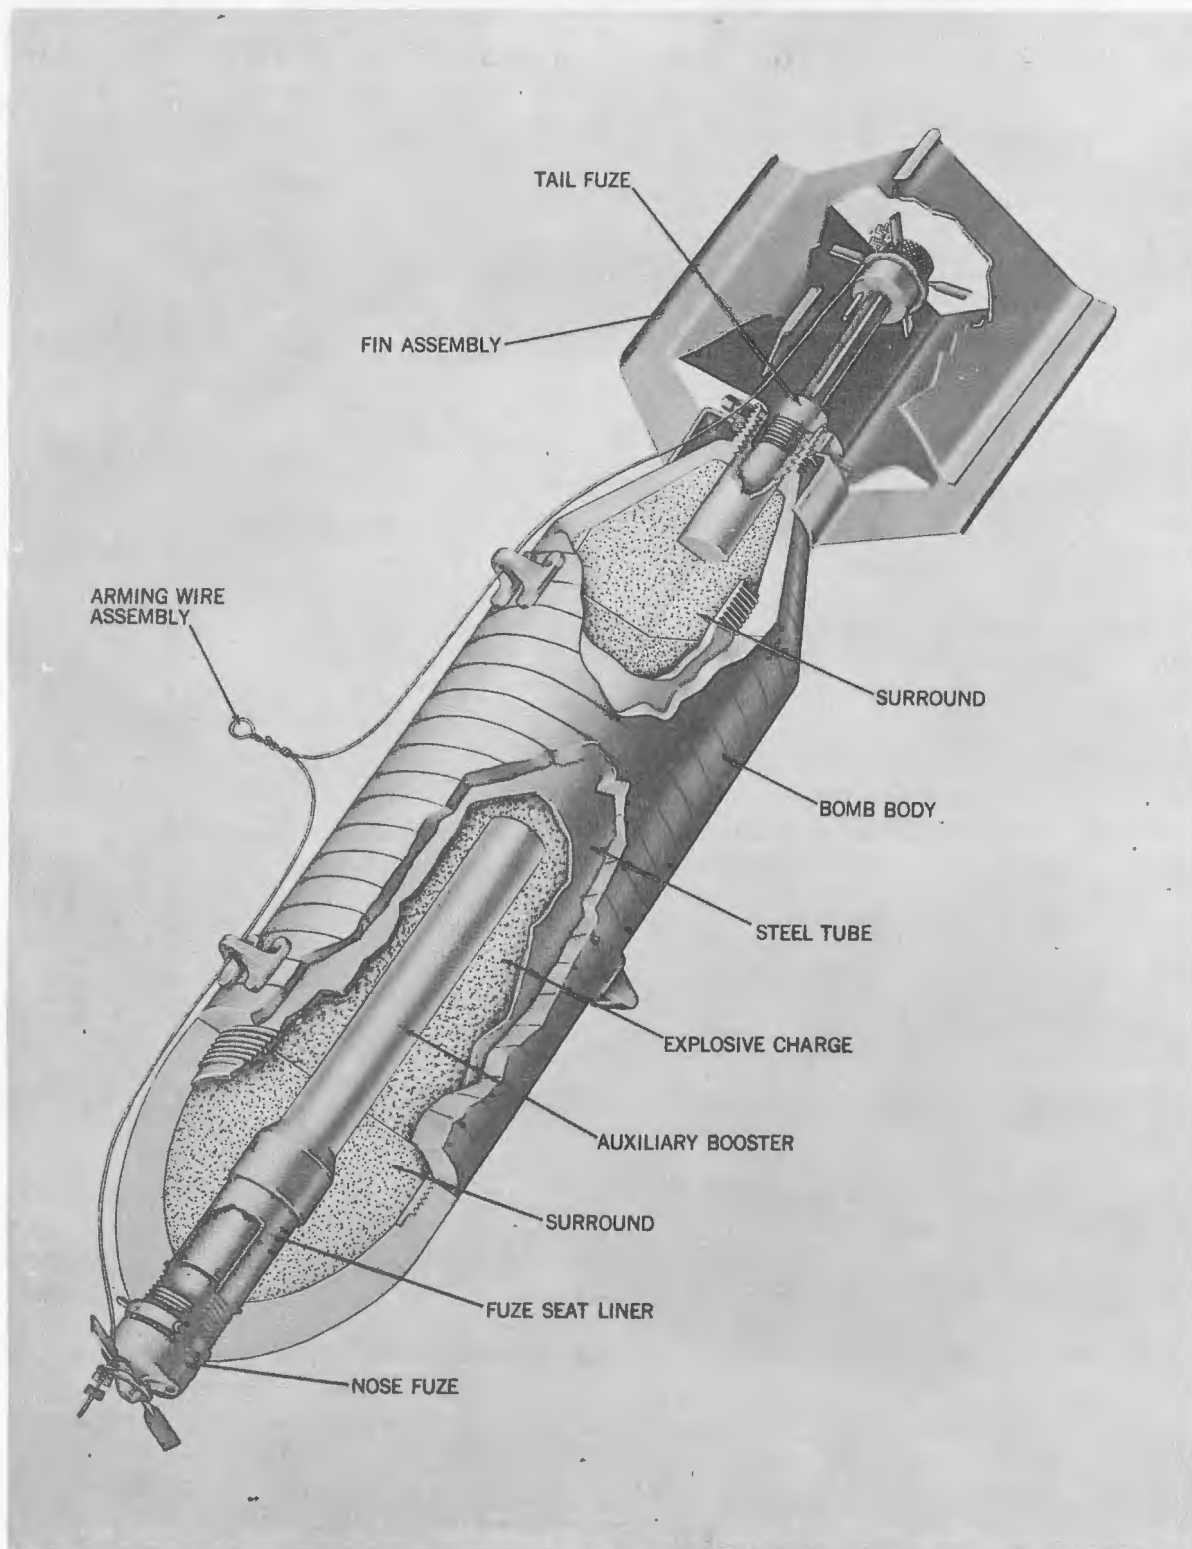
260-lb Frag Bomb AN-M81 with Fin Assembly AN-M103A1, Cutaway View.
